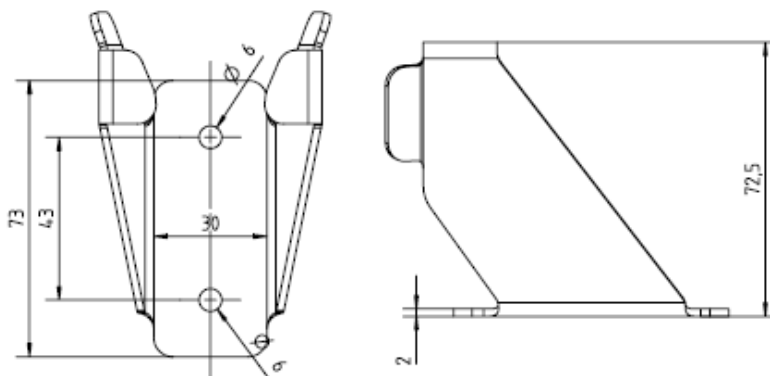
Front and side view of the wall bracket (all dimensions in mm)
